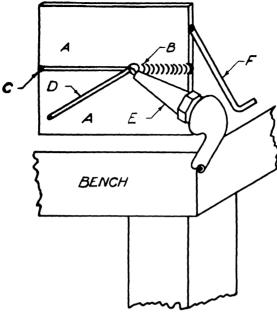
Horizontal welding a butt weld: A. Parent metal, B. Bead, C. Tack, D. Filler rod, E. Torch, F. Parent metal brace
